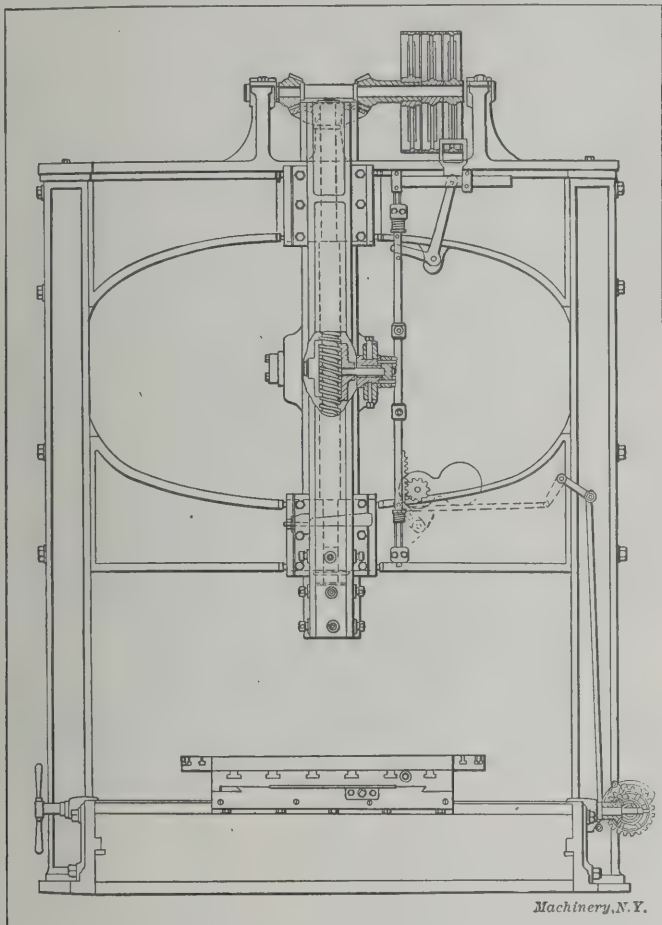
Slotting Machine, Screw-driven. Front Elevation.
